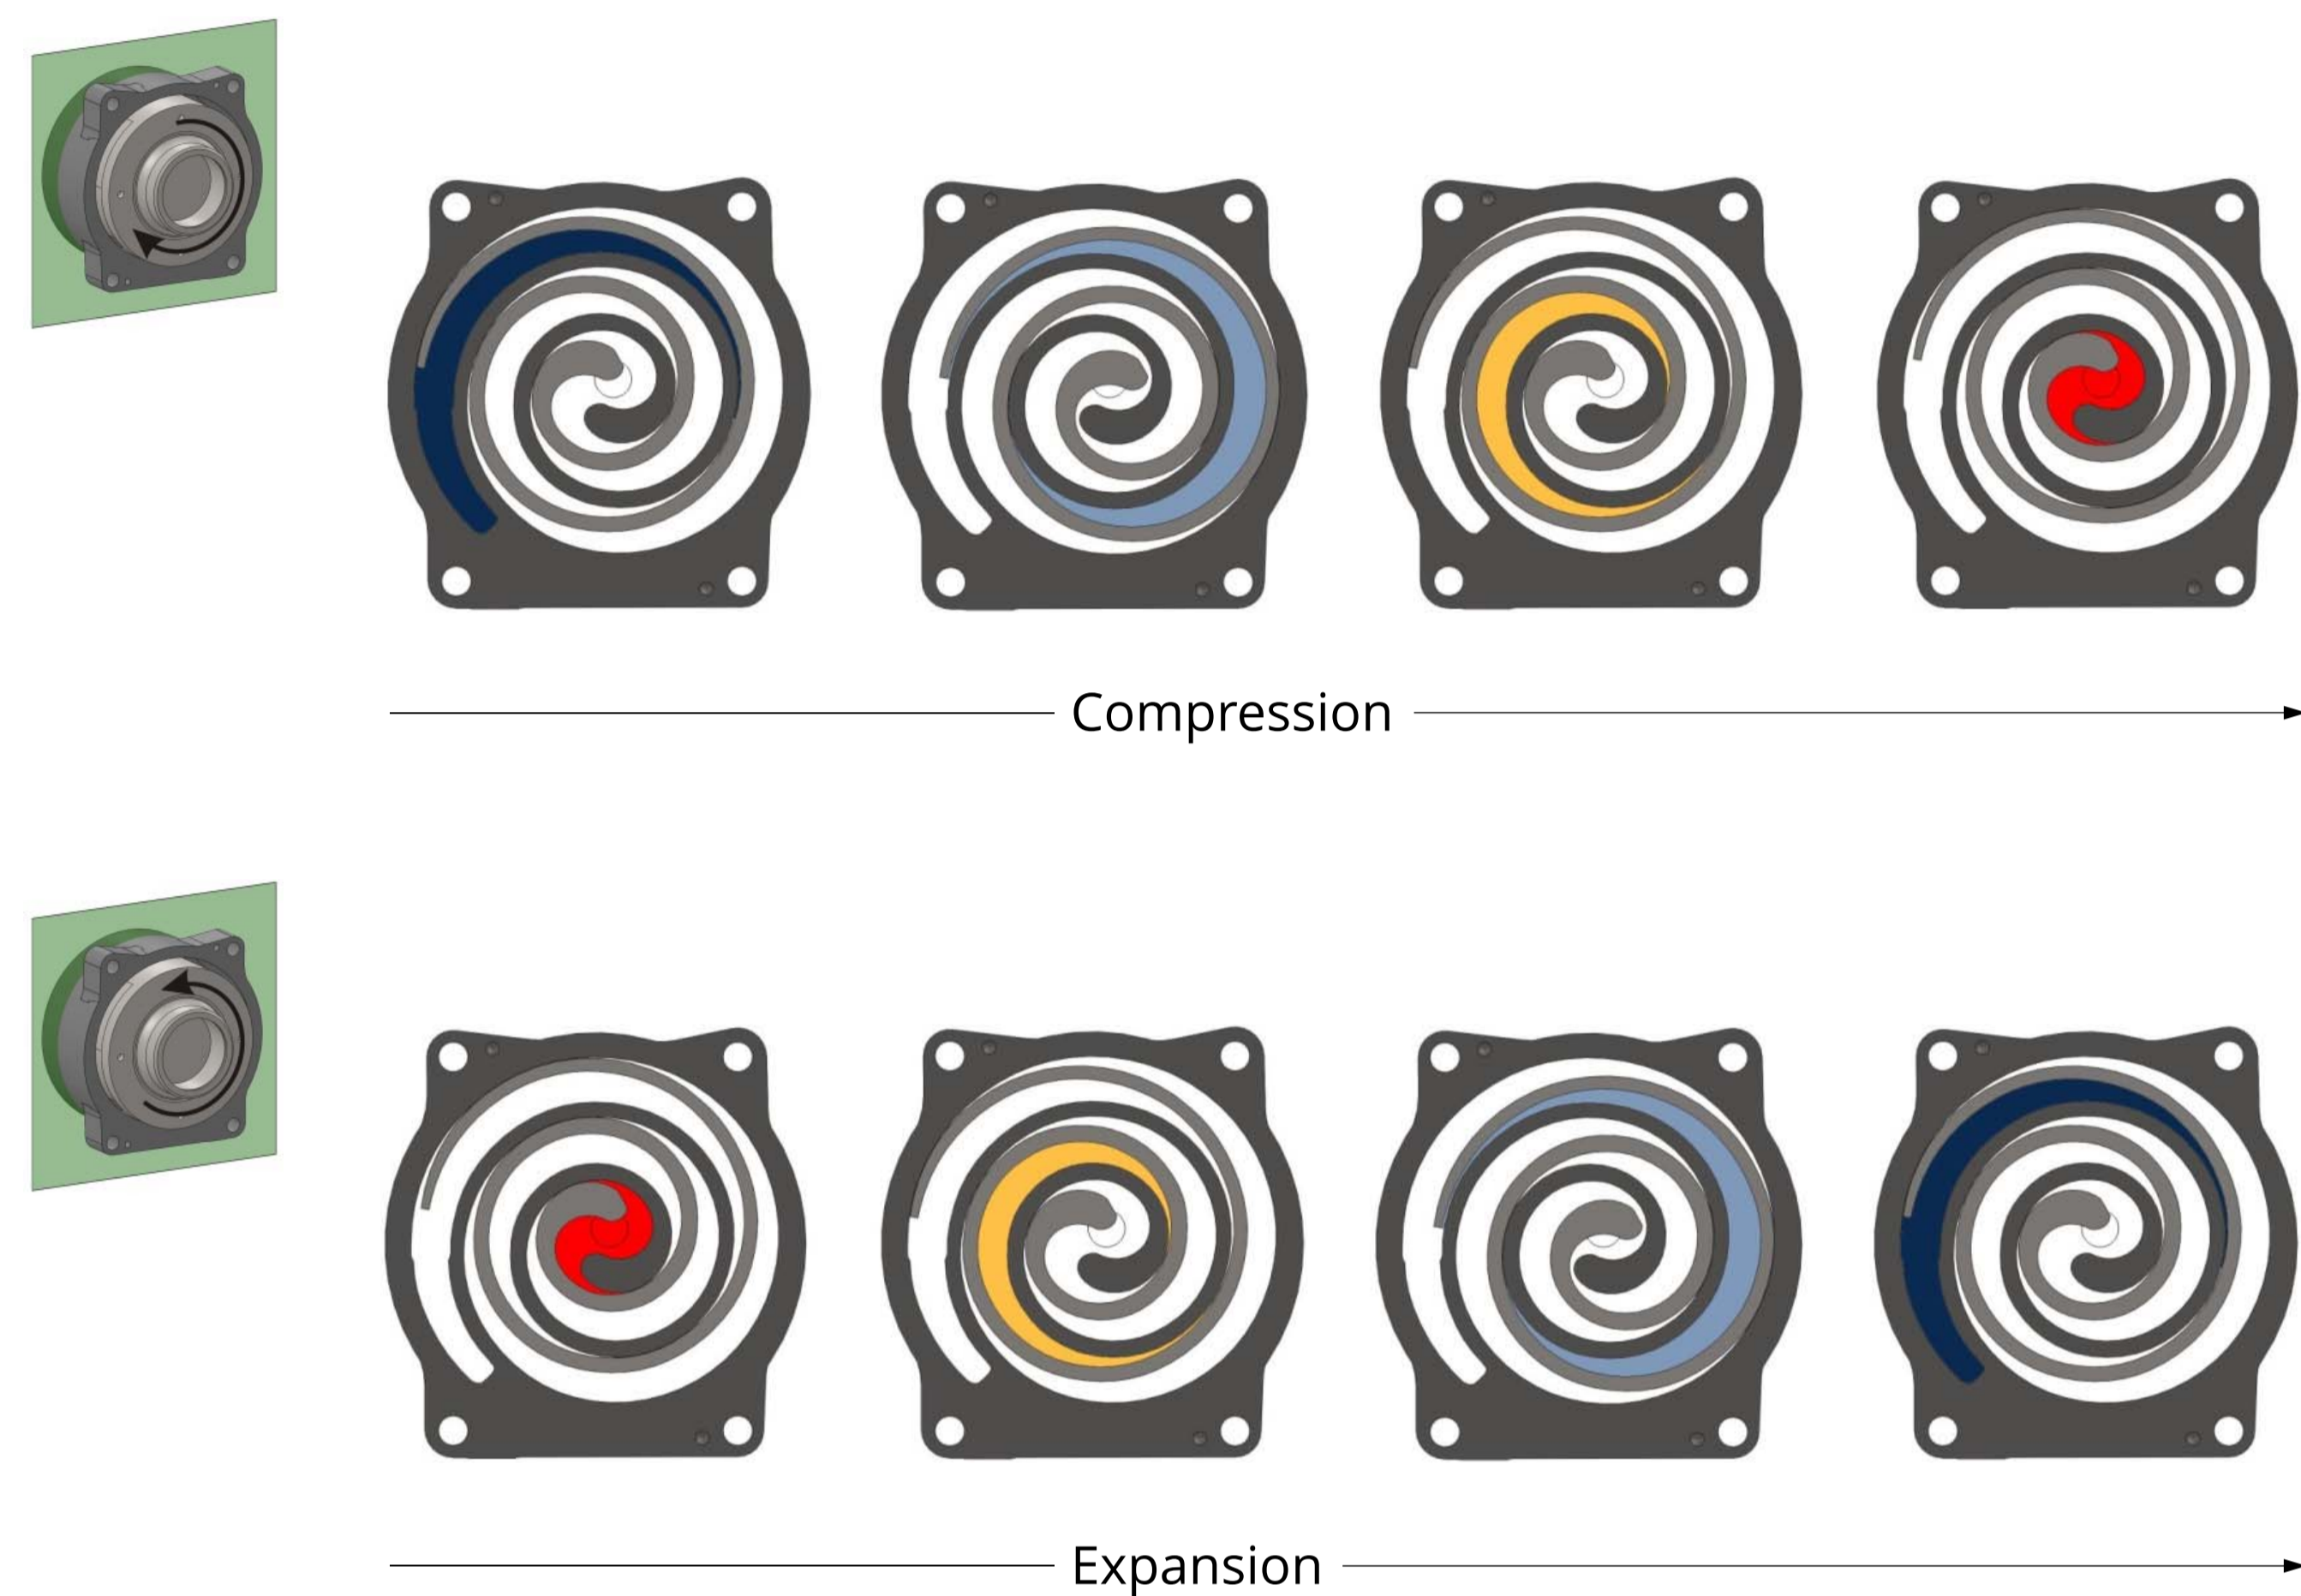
Cross-sectional view of the compression process (upper) and expansion process (lower)
